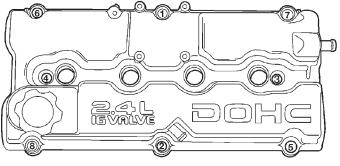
Cylinder Head Cover Gasket and Spark Plug Seals
